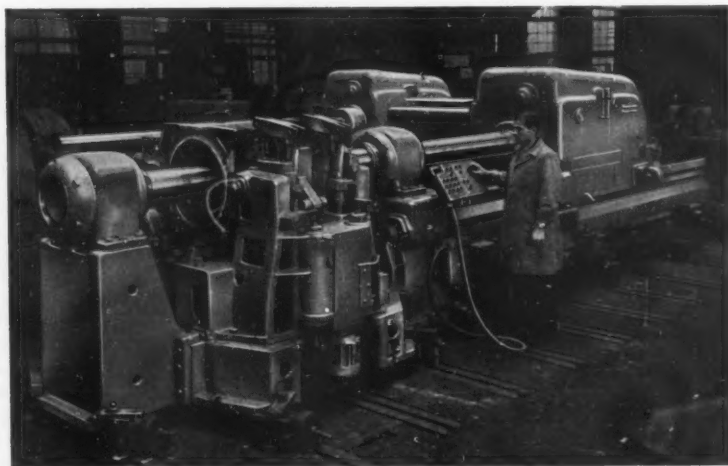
The Double-head Machine here shown is Employed for Boring Operations on Electric Traction Motor Bodies and has been Built by the Sverdlov Plant. It Incorporates Headstock Units of Standard Design which are Traversed by Short Screws and Long Half-nuts, Installed Between the Bed Ways
